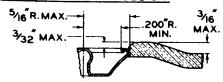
DETAILS OF RECESSED SMALL BALL CAP & BULB ASSEMBLY
